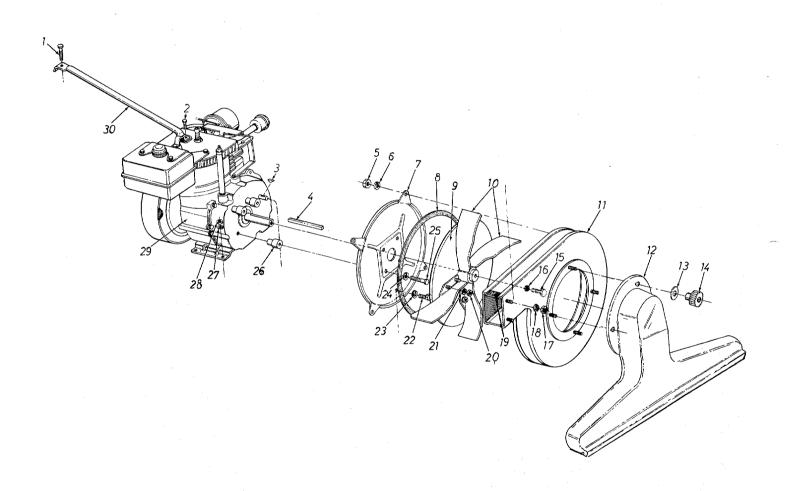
EXPLODED VIEW OF DRIVE ASSEMBLY
